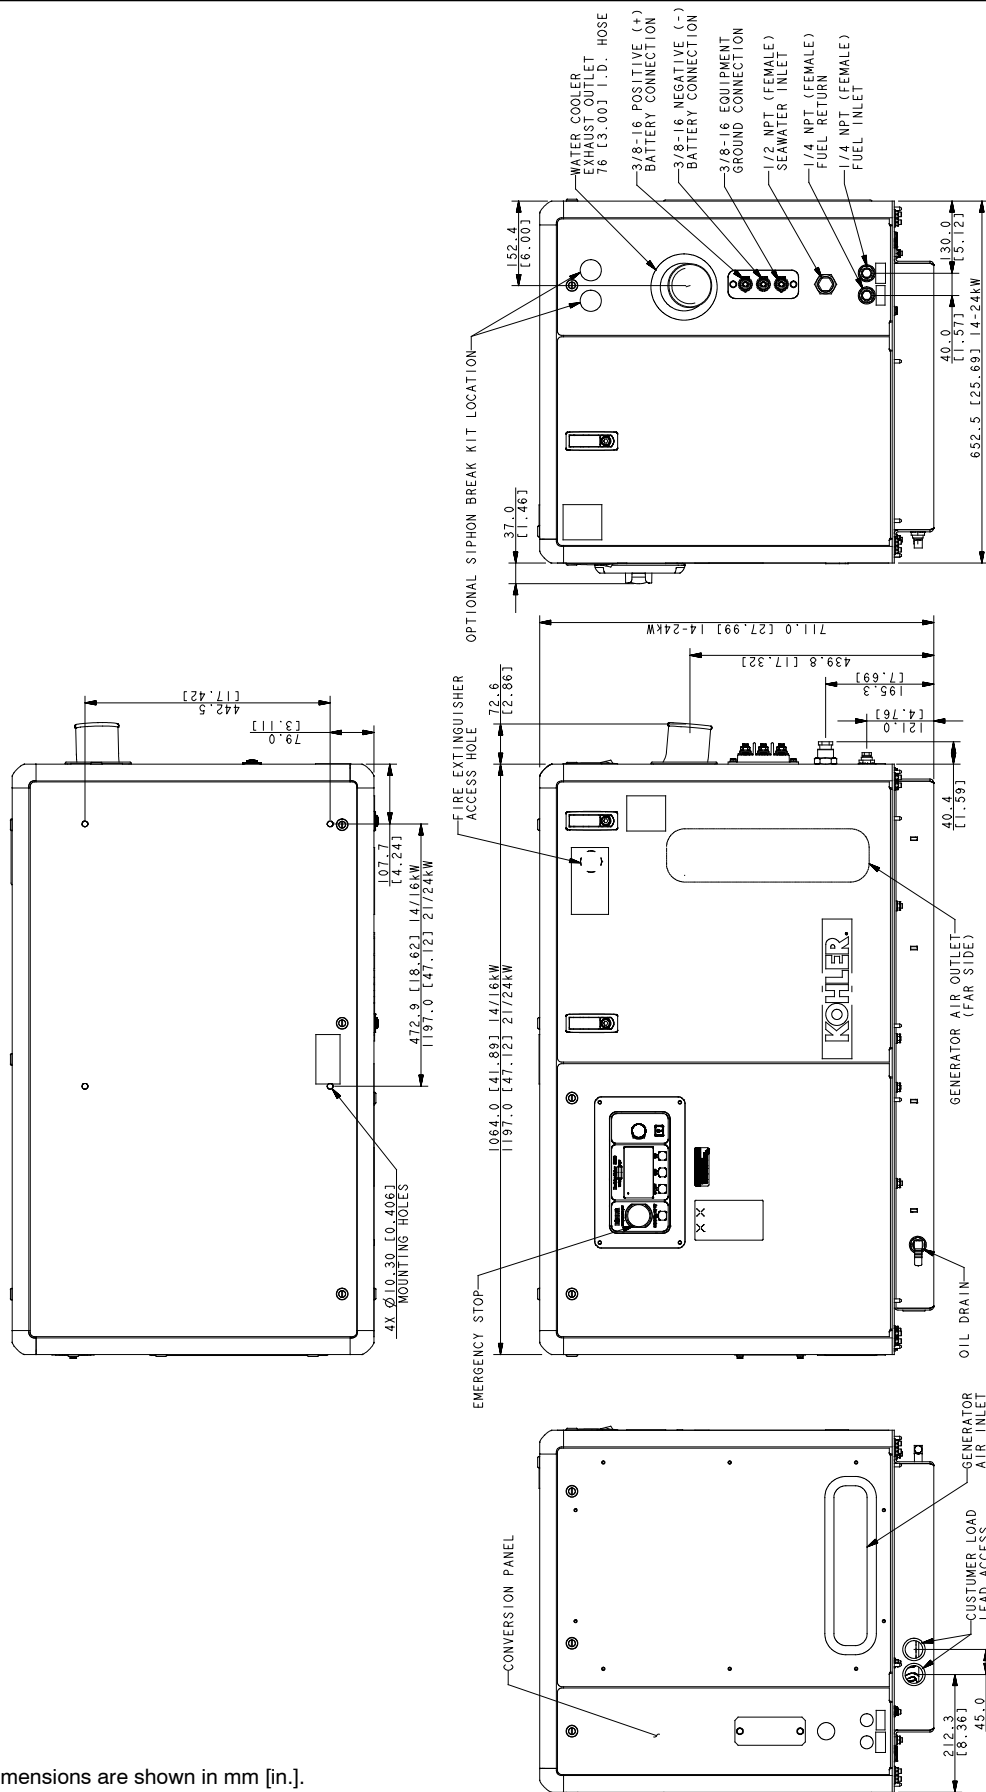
Dimension Drawing—Sound Shield, 14- 24EKOZD and 12- 20.5EFKOZD (Sheet 2 of 4)
